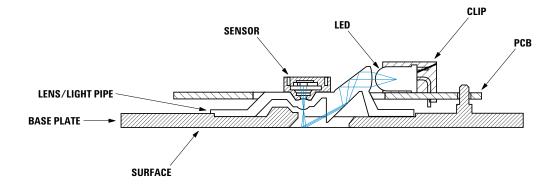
Sectional view of PCB assembly highlighting optical mouse components.
